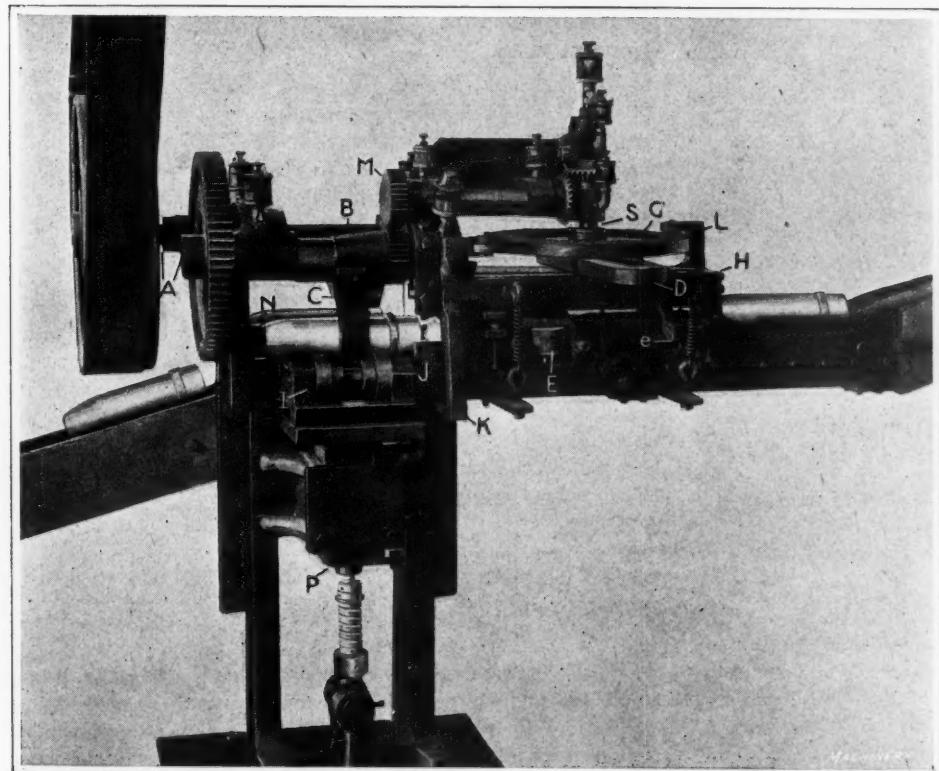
Automatic Shell Marking Machine with Shell in Position to be ejected after having been marked
